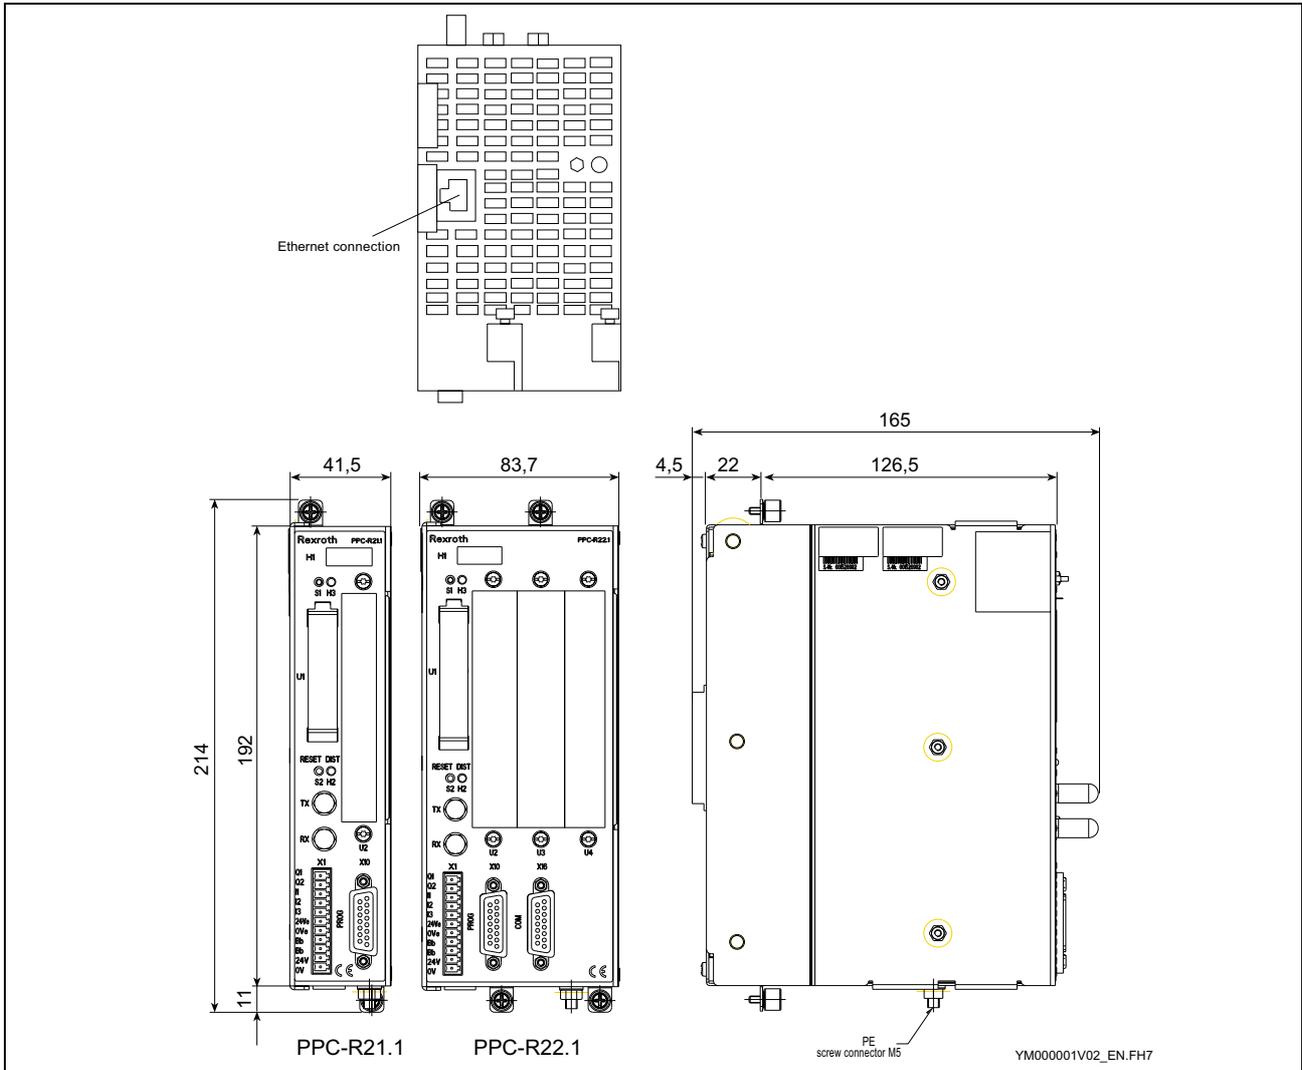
Dimensional sheet PPC-R21.1 and PPC-R22.1
